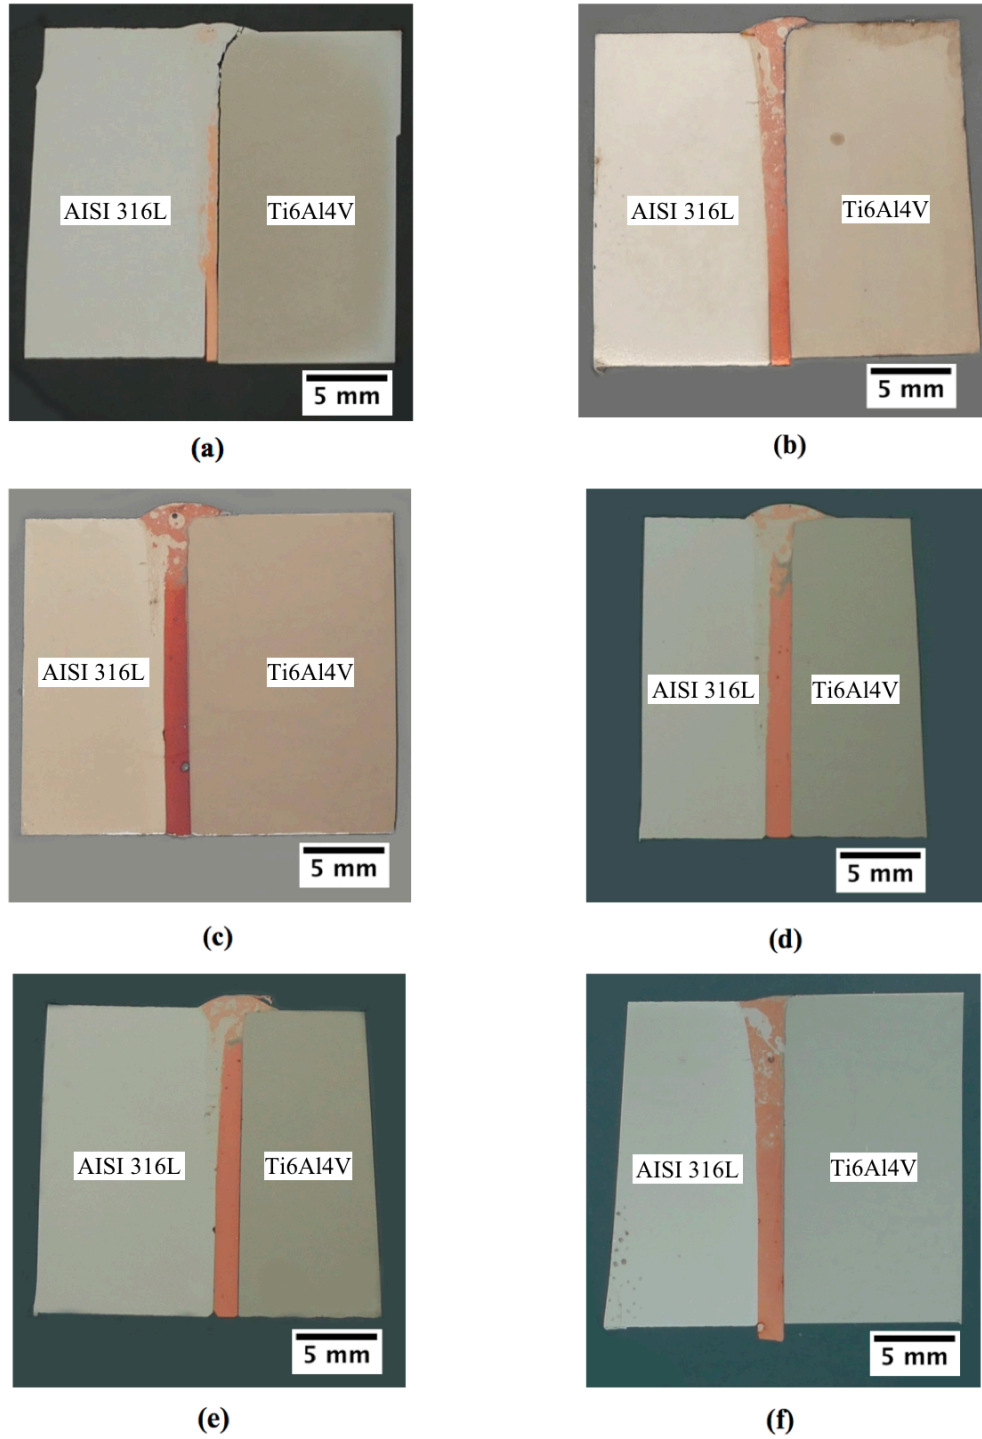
Cross section of Ti6Al4V-AISI 316L one pass weld preheated samples (a) weld 13 (b) weld 14 (c) weld 16 (d) weld 18 (e) weld 19 (f) weld 20. All welding parameters are listed in table 3.11.
